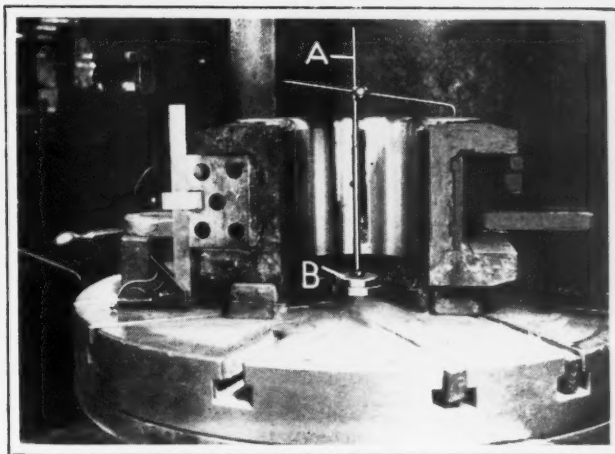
Gage for Setting Driving-box on Table of Boring Mill
